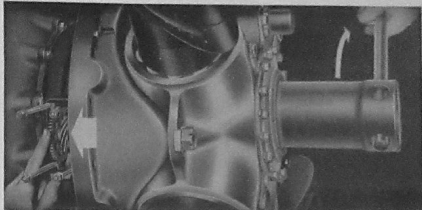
Turning Hub Retaining Nut and Meshing Governor Drive & Idler Gear
